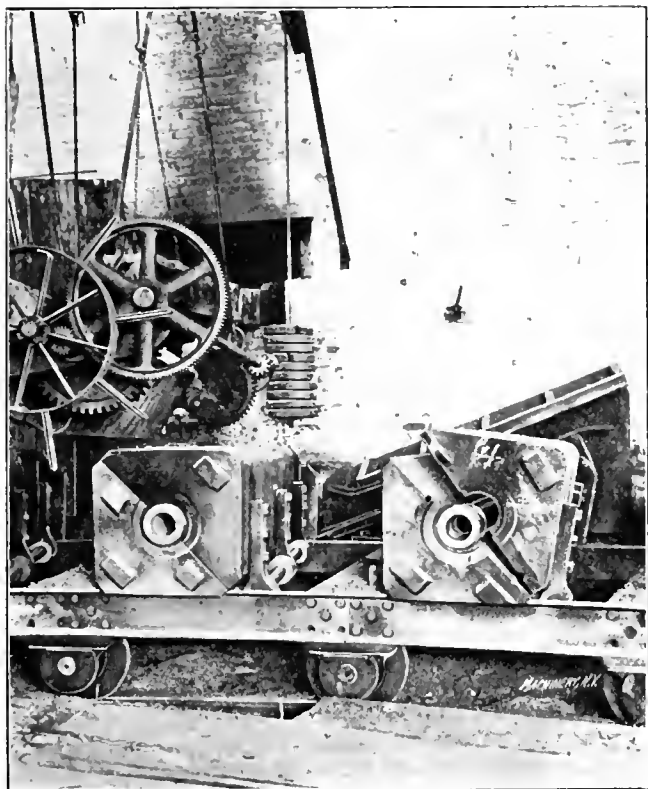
Immediately after Pouring. Mold, entering Opening Device, partially opened.
